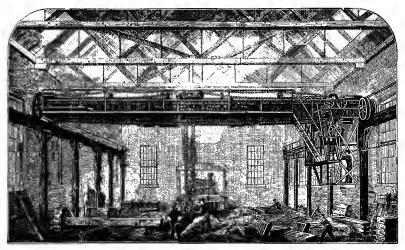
Power Traveling Crane, as applied to Foundry Use.
